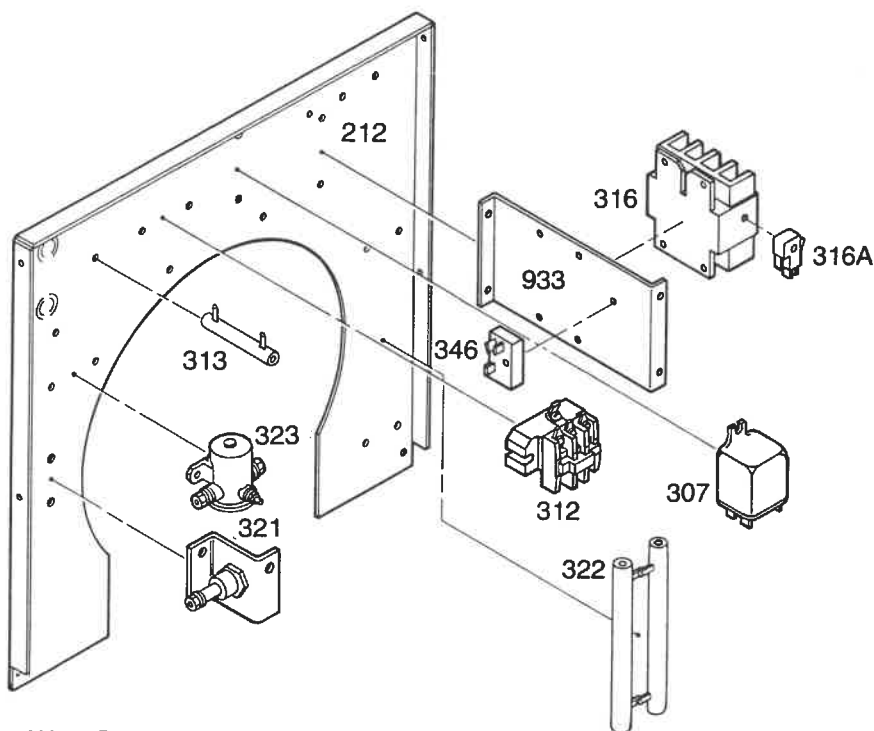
Models 3W056B & 3W057B Back Panel Assembly
